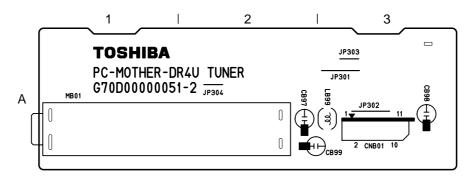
EU05A Tuner Unit PC Broad (Top side)
